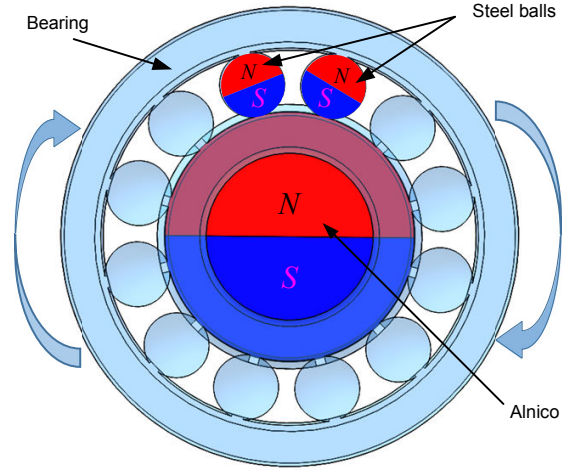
Illustration of the magnetization on a stainless-steel bearing.
